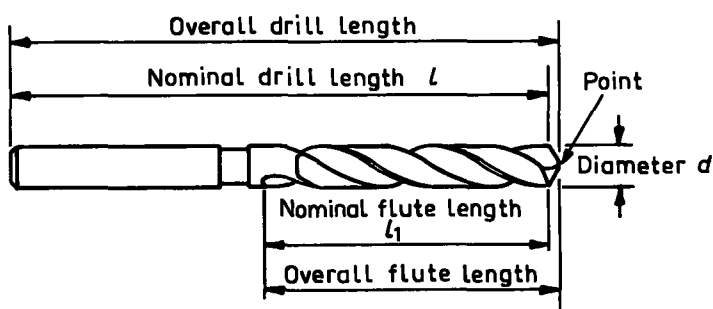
GENERAL DETAILS—PARALLEL SHANK TWIST DRILL
